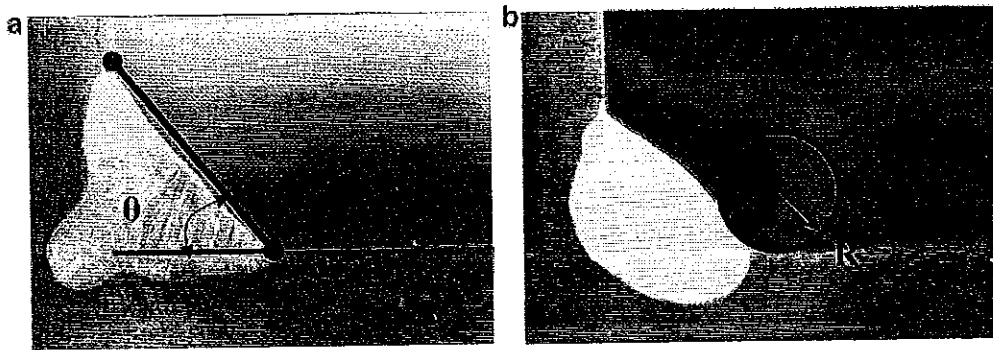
(a) Weld toe tangent angle, θ , in as welded specimen and (b) weld toe radii after weld toe grinding.
